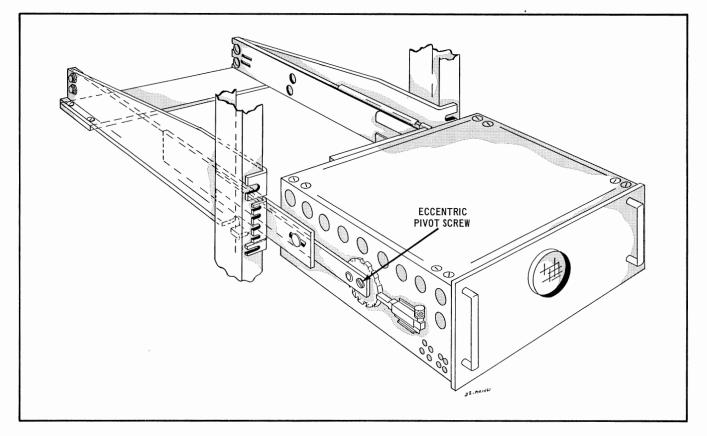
The completed installation. It may be necessary to loosen the bolts and allow the slide mechanism to adjust to the weight of the instrument.
